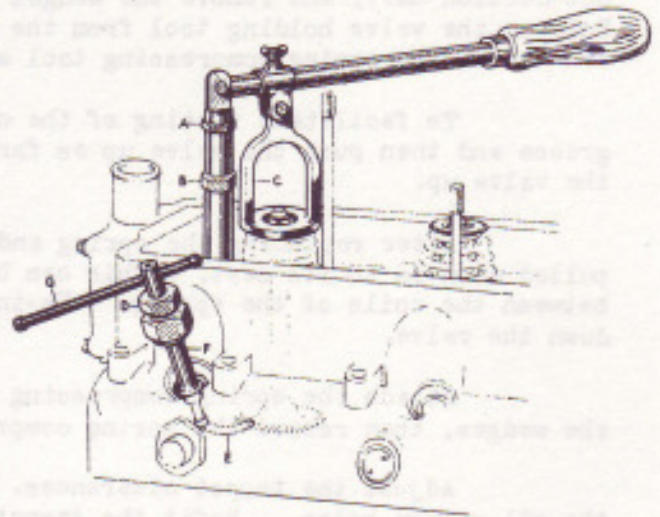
VALVE SPRING COMPRESSING TOOL AND VALVE HOLDER IN POSITION.
